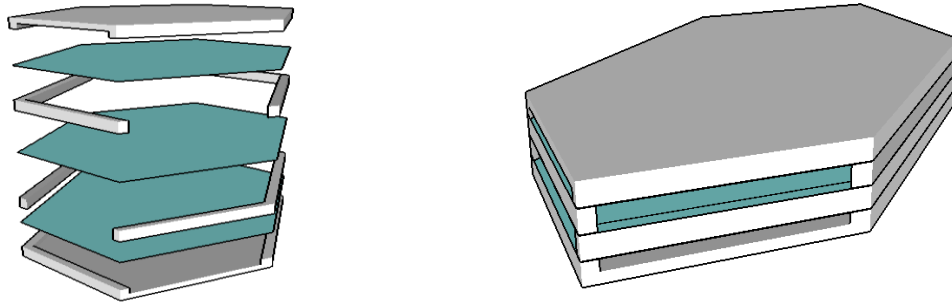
Heat exchanger made of sandwich construction. Drawing of layer prototype.
